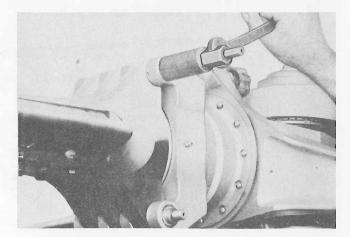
Using Special Puller to Remove Main Rotor Blade Taper Pins
